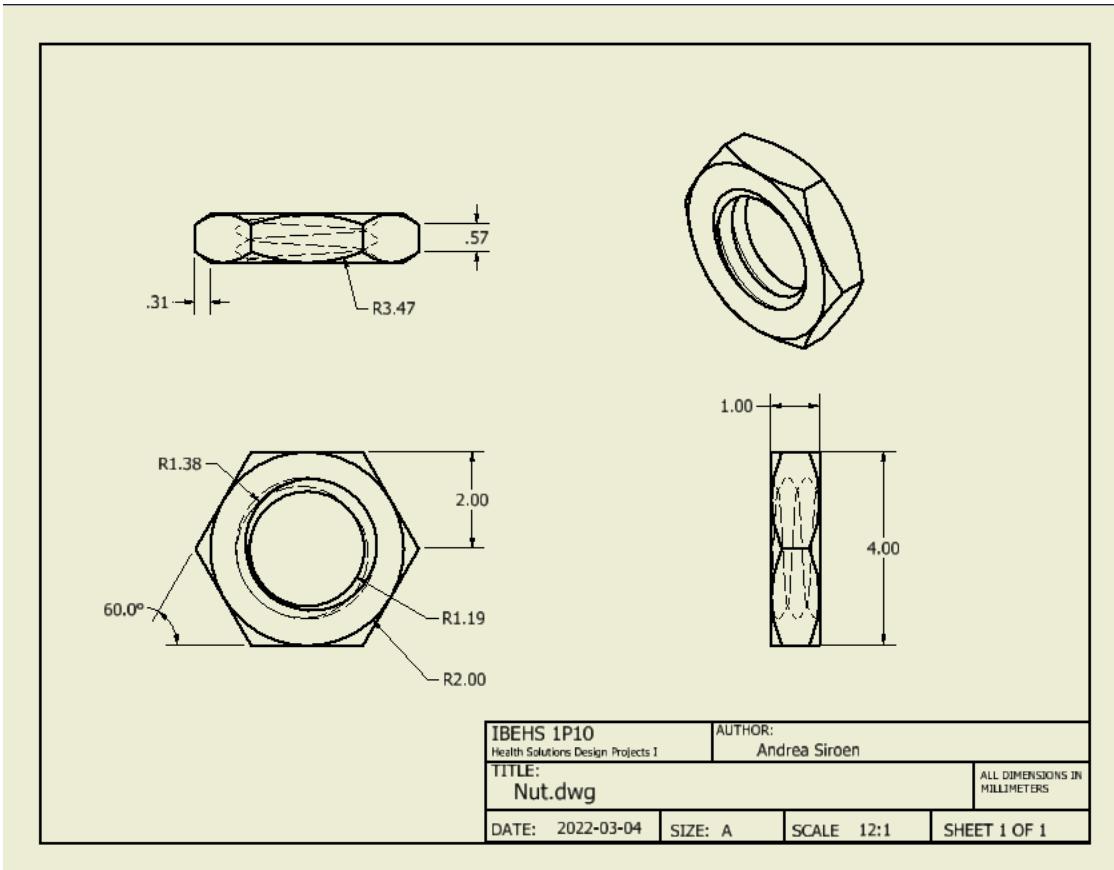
Nut which interfaces with bolt for adjustable footings
